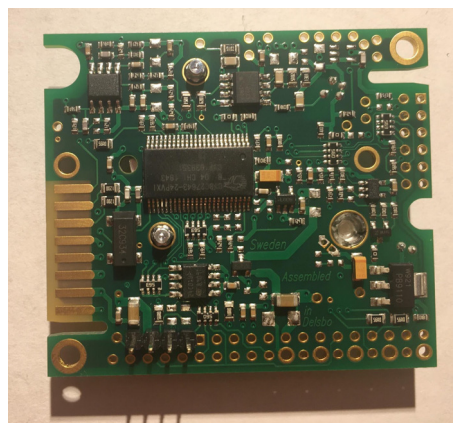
Bottom view of the CO₂ sensor after soldering the 4-pin male headers.
